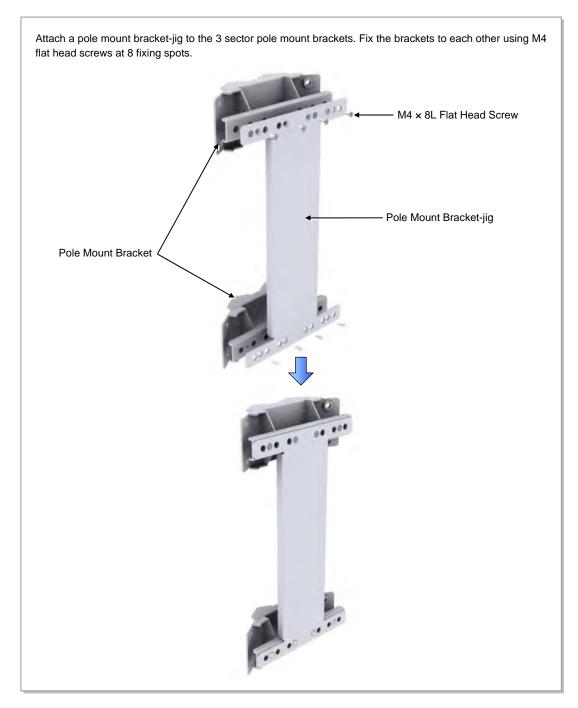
Fixing 3 Sector Pole Type RRH-2WB (1)
